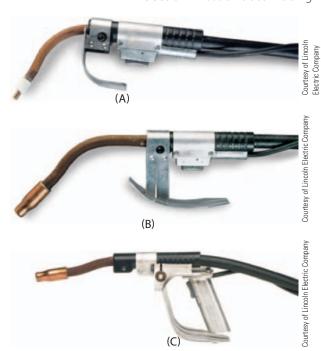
Typical FCA welding guns: (A) 350 ampere rating self-shielding, (B) 450 ampere rating gas-shielding, and (C) 600 ampere rating gas-shielding.
